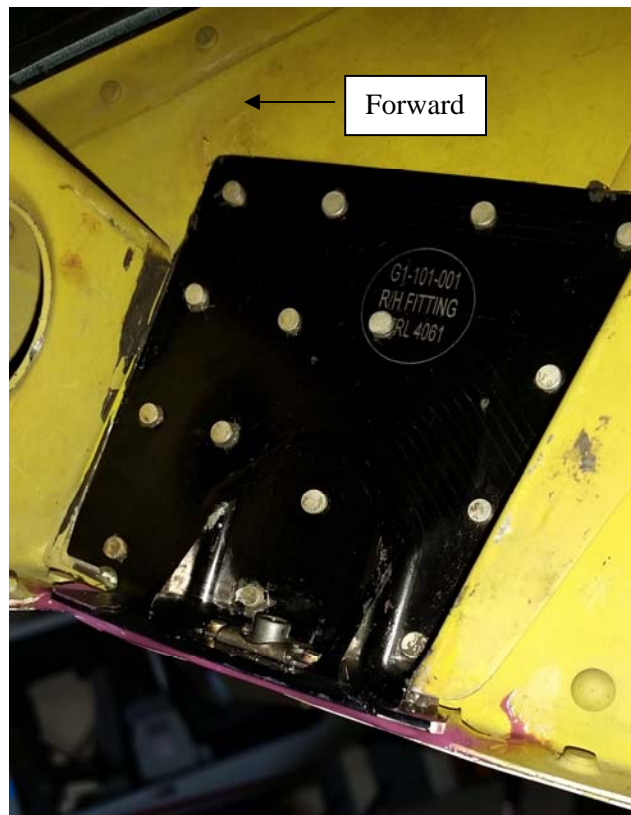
View Showing the Repair Fitting Installed (RH Side)
